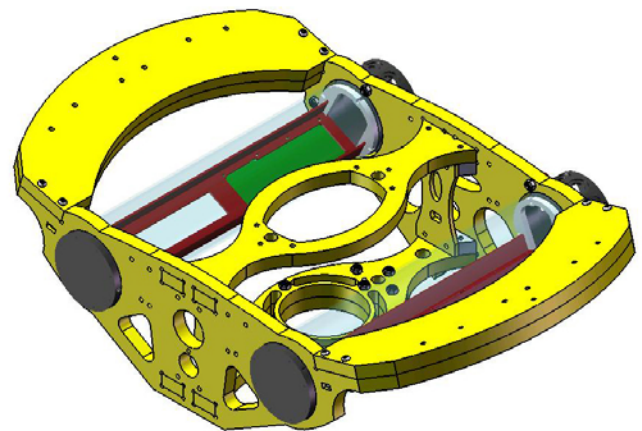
SOLIDWORKS INITIAL FRAME LAYOUT
